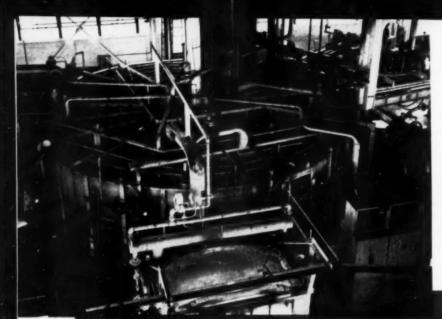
Overhead View of Rotary-Hearth Doughnut-Type Furnace for Heating Billets Prior to Press Forging. Oil-fired, the 32-ft. diameter unit will handle up to 300 billets per hr.
